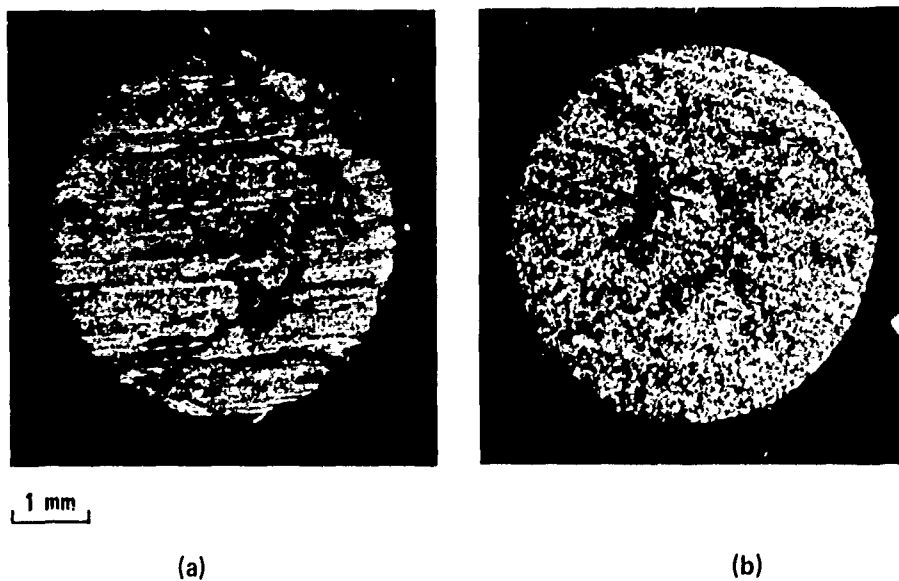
Macrophotographs of the fracture surfaces for the transverse tensile specimens of HF-1 steel with (a) heat treatment A in experiment 1 and (b) heat treatment B in experiment 3.
